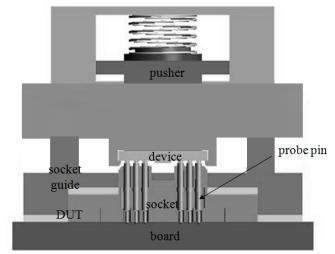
Contact between device and socket. DUT is a unit which is tested being placed device, in above picture guide, socket and board are called collectively.
